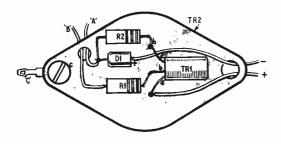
Layout and wiring of all components except LPI and $\boldsymbol{X}\boldsymbol{I}$
